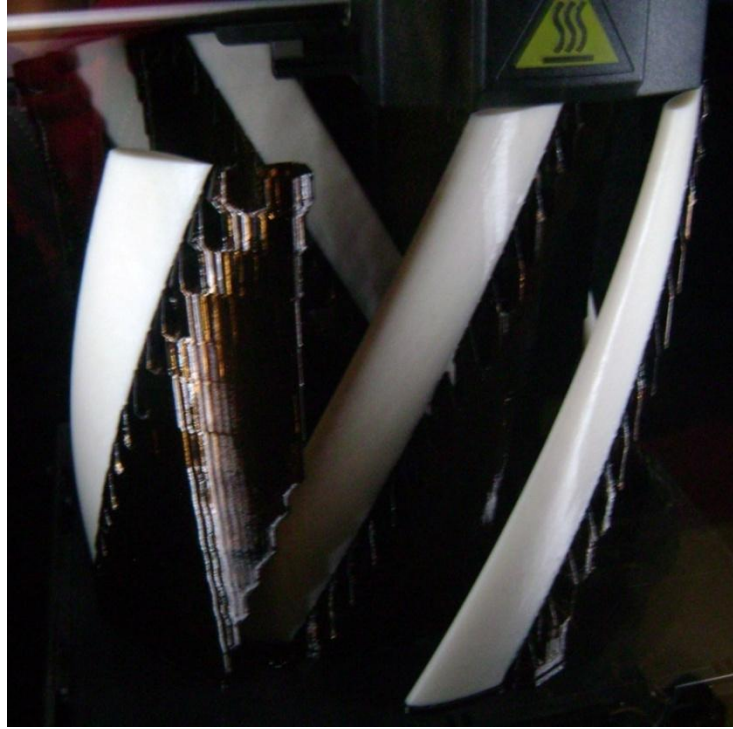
Rapid Prototype Machine printing NACA 0022 blades, six-bladed turbine
